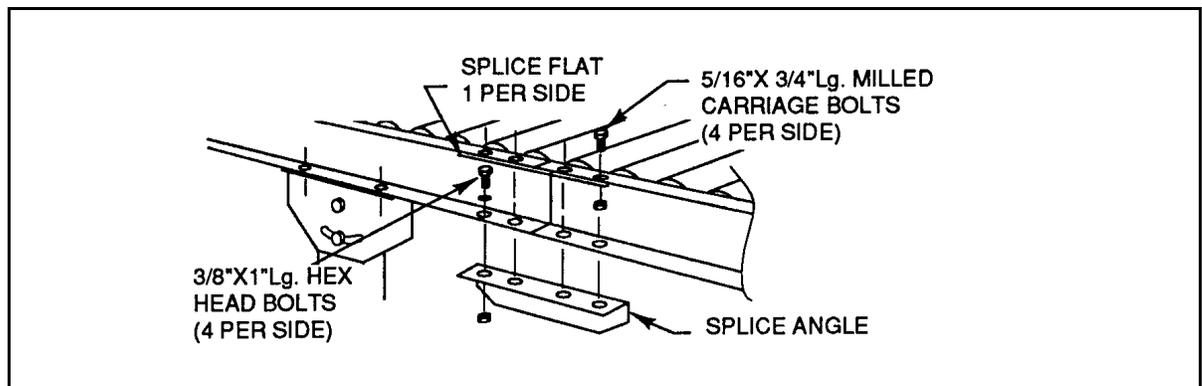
Use Splice Angle Assembly at Splice Point When Floor Support or Ceiling Hanger Must Be Offset
